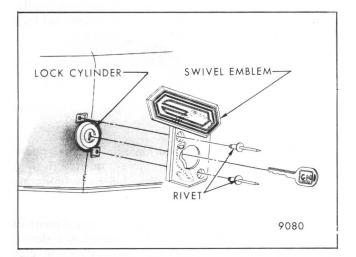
Typical Swivel Emblem - Rivet Retained - Oldsmobile Style Shown
